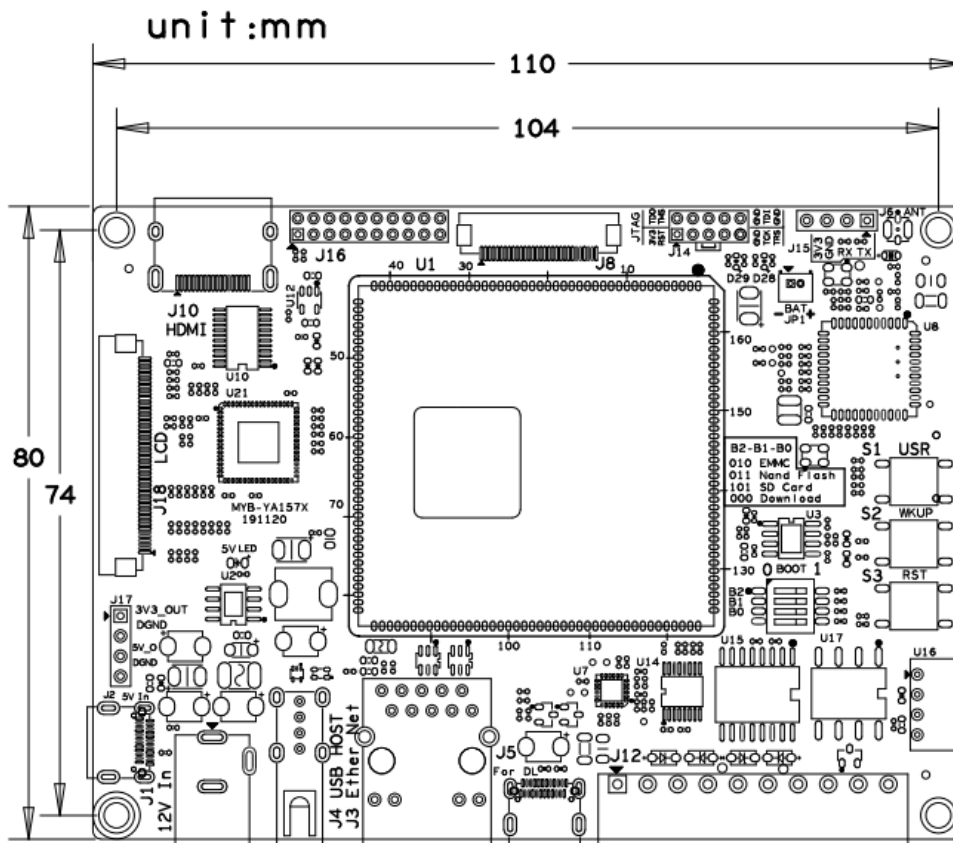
MYD-YA157C Base Board Dimensions Chart
